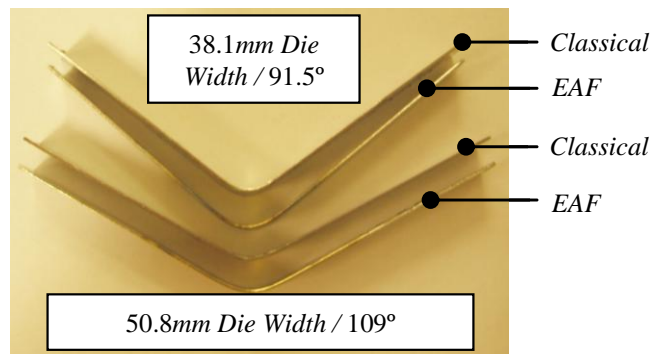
304 SS Sheet bending specimens [89]-[90]. Sheet metal bending specimens are shown with two different die widths for classical and EA-bending tests.
